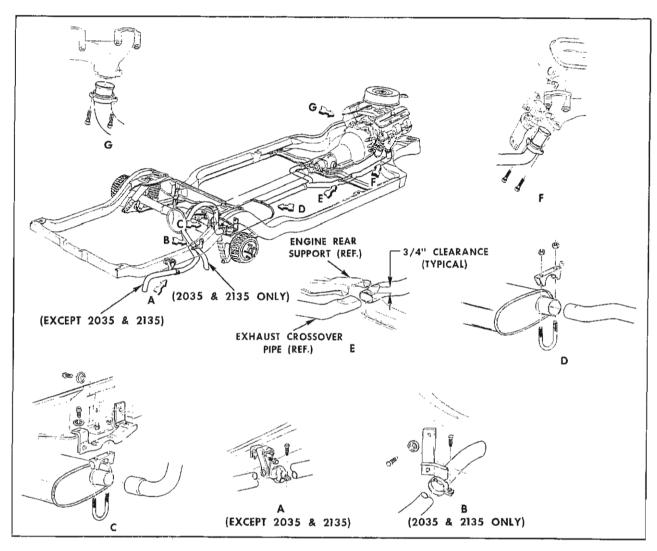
Exhaust System - Eight Cylinder Engine, Single Exhaust
